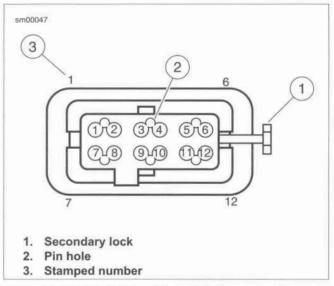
Delphi Micro-64 Sealed Connector: Housing
